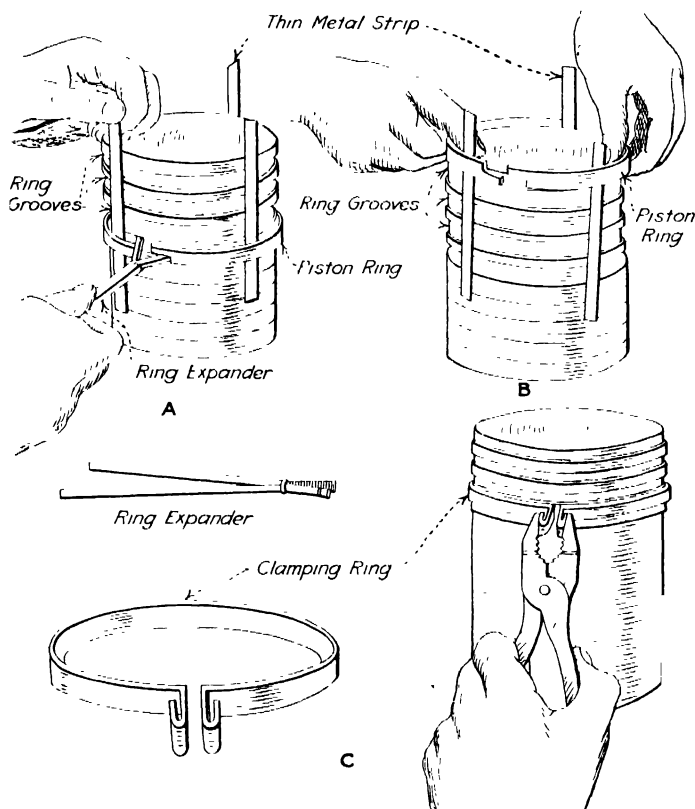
Method of Removing Piston Rings and Simple Clamp to Facilitate Insertion of Rings in Cylinder Bore. A—How to Use Expander. B—Metal Strips to Permit Working Ring Over Piston Grooves. C—Clamp for Compressing Rings and its Use.
